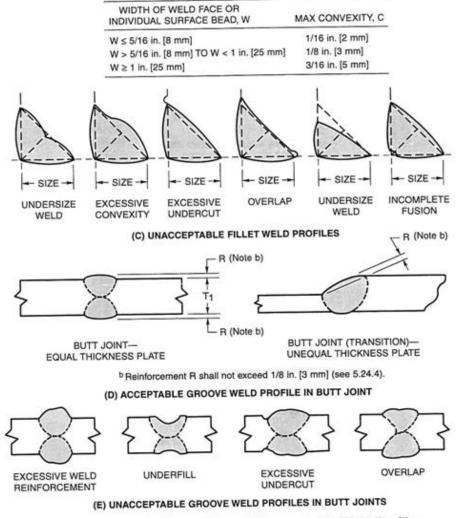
Acceptable and Unacceptable Weld Profiles
